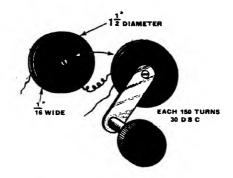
Suitable dimensions for the phasing coils shown in Fig. 9.36
